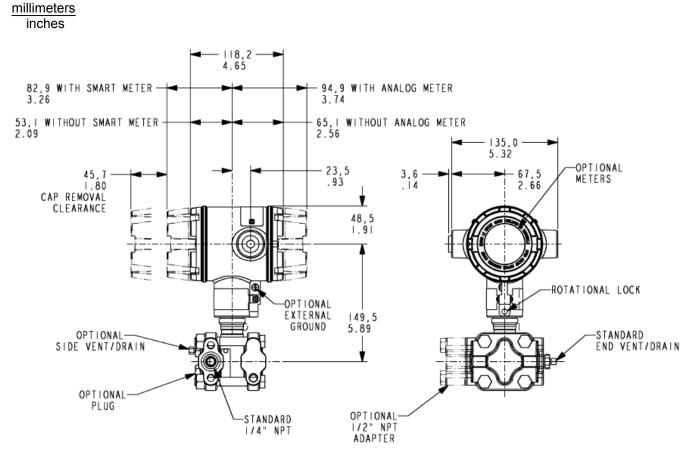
Typical mounting dimensions for dual-head models STG944 and STG974 for reference
